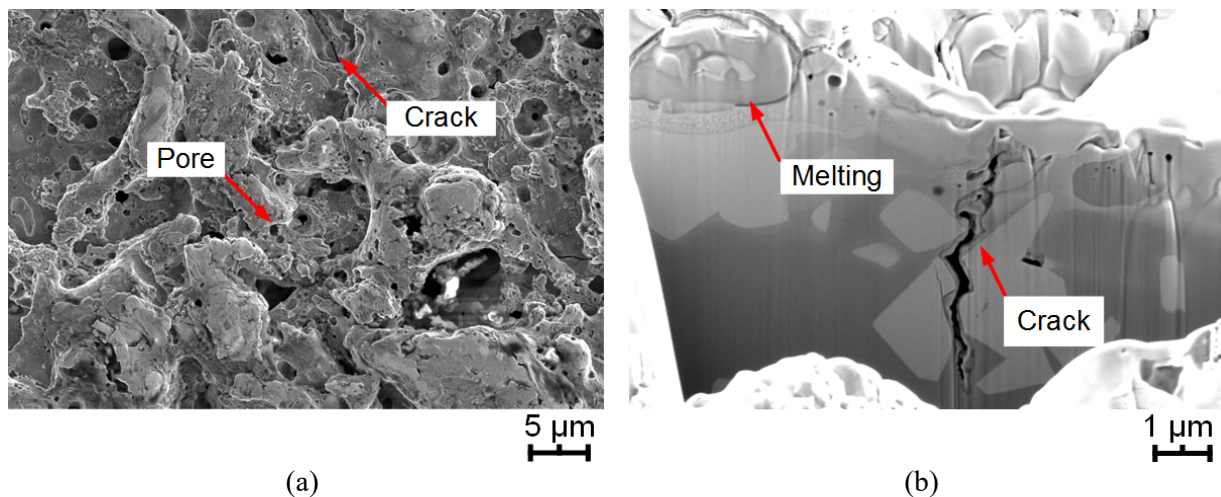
VN77 specimen shaped by W-EDM: (a) surface inspection by SEM, (b) FIB cross-section
